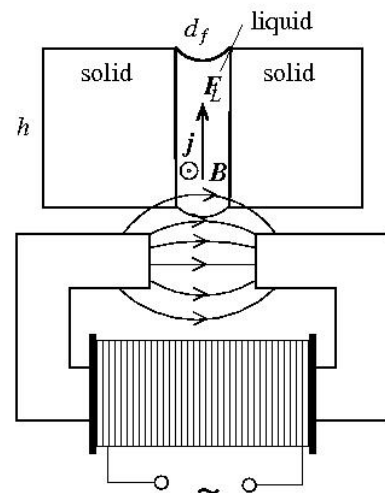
Schematic view of the inductive EM weld-pool support system.
